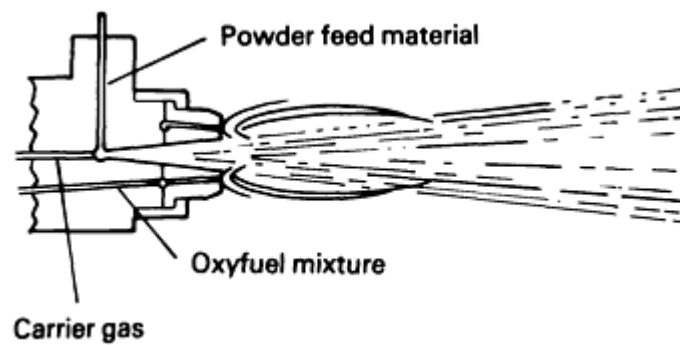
CROSS-SECTIONAL VIEW OF A FLAME POWDER SPRAYING SYSTEM SHOWING POWDER FEED MATERIAL BEING TRANSPORTED BY THE CARRIER GAS AND THEN MELTED BY THE OXYFUEL MIXTURE
